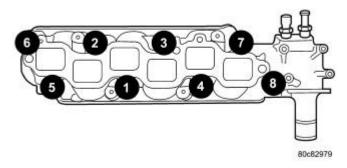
Lower Intake Manifold Courtesy of CHRYSLER LLC
